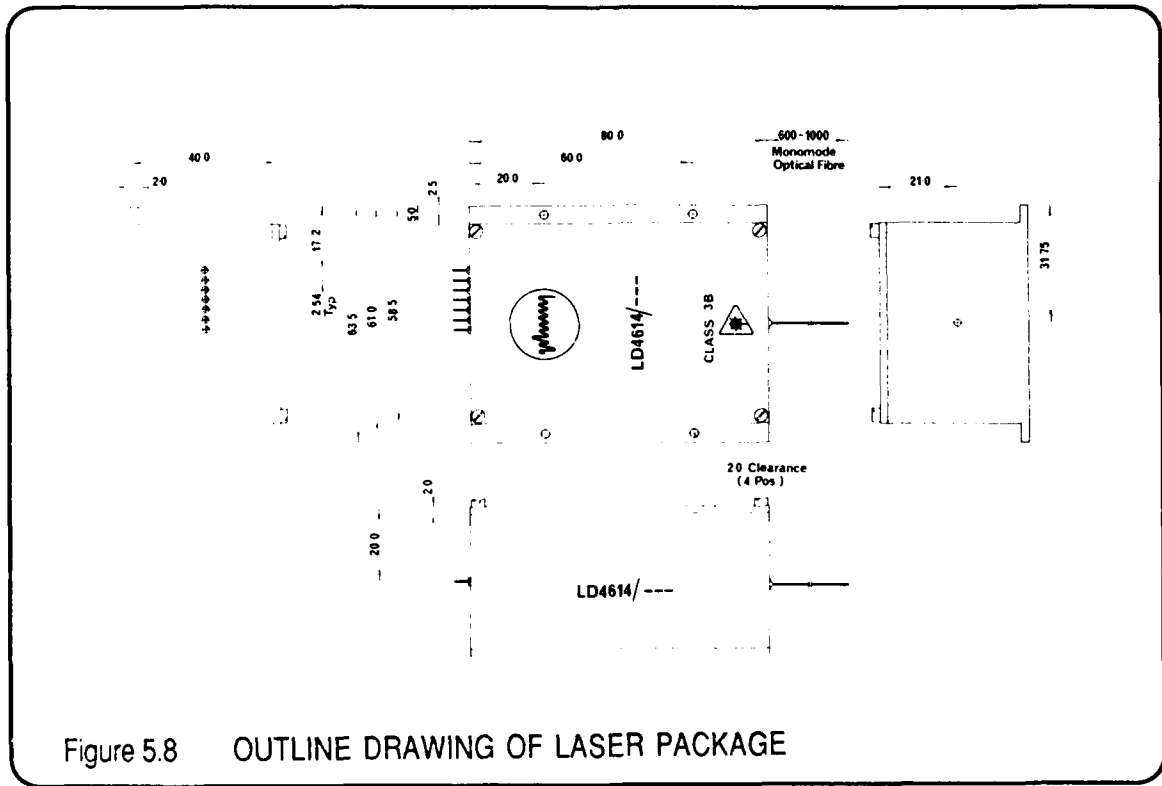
OUTLINE DRAWING OF LASER PACKAGE
